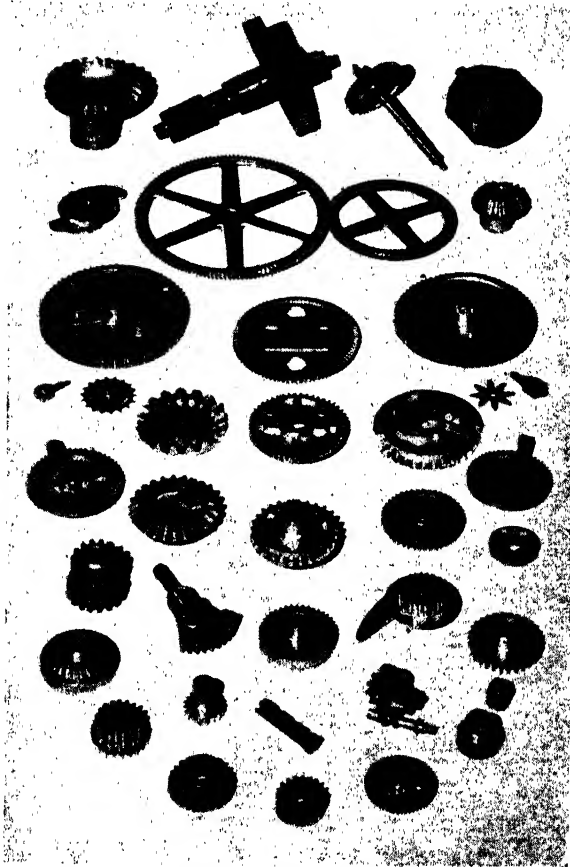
All these gears, many of them integral with other parts, are die cast with the teeth formed in the die and require no machine work except, in some cases, removing a slight amount of metal in a shaving die. By no other process can such parts be produced so accurately at so low a cost.
